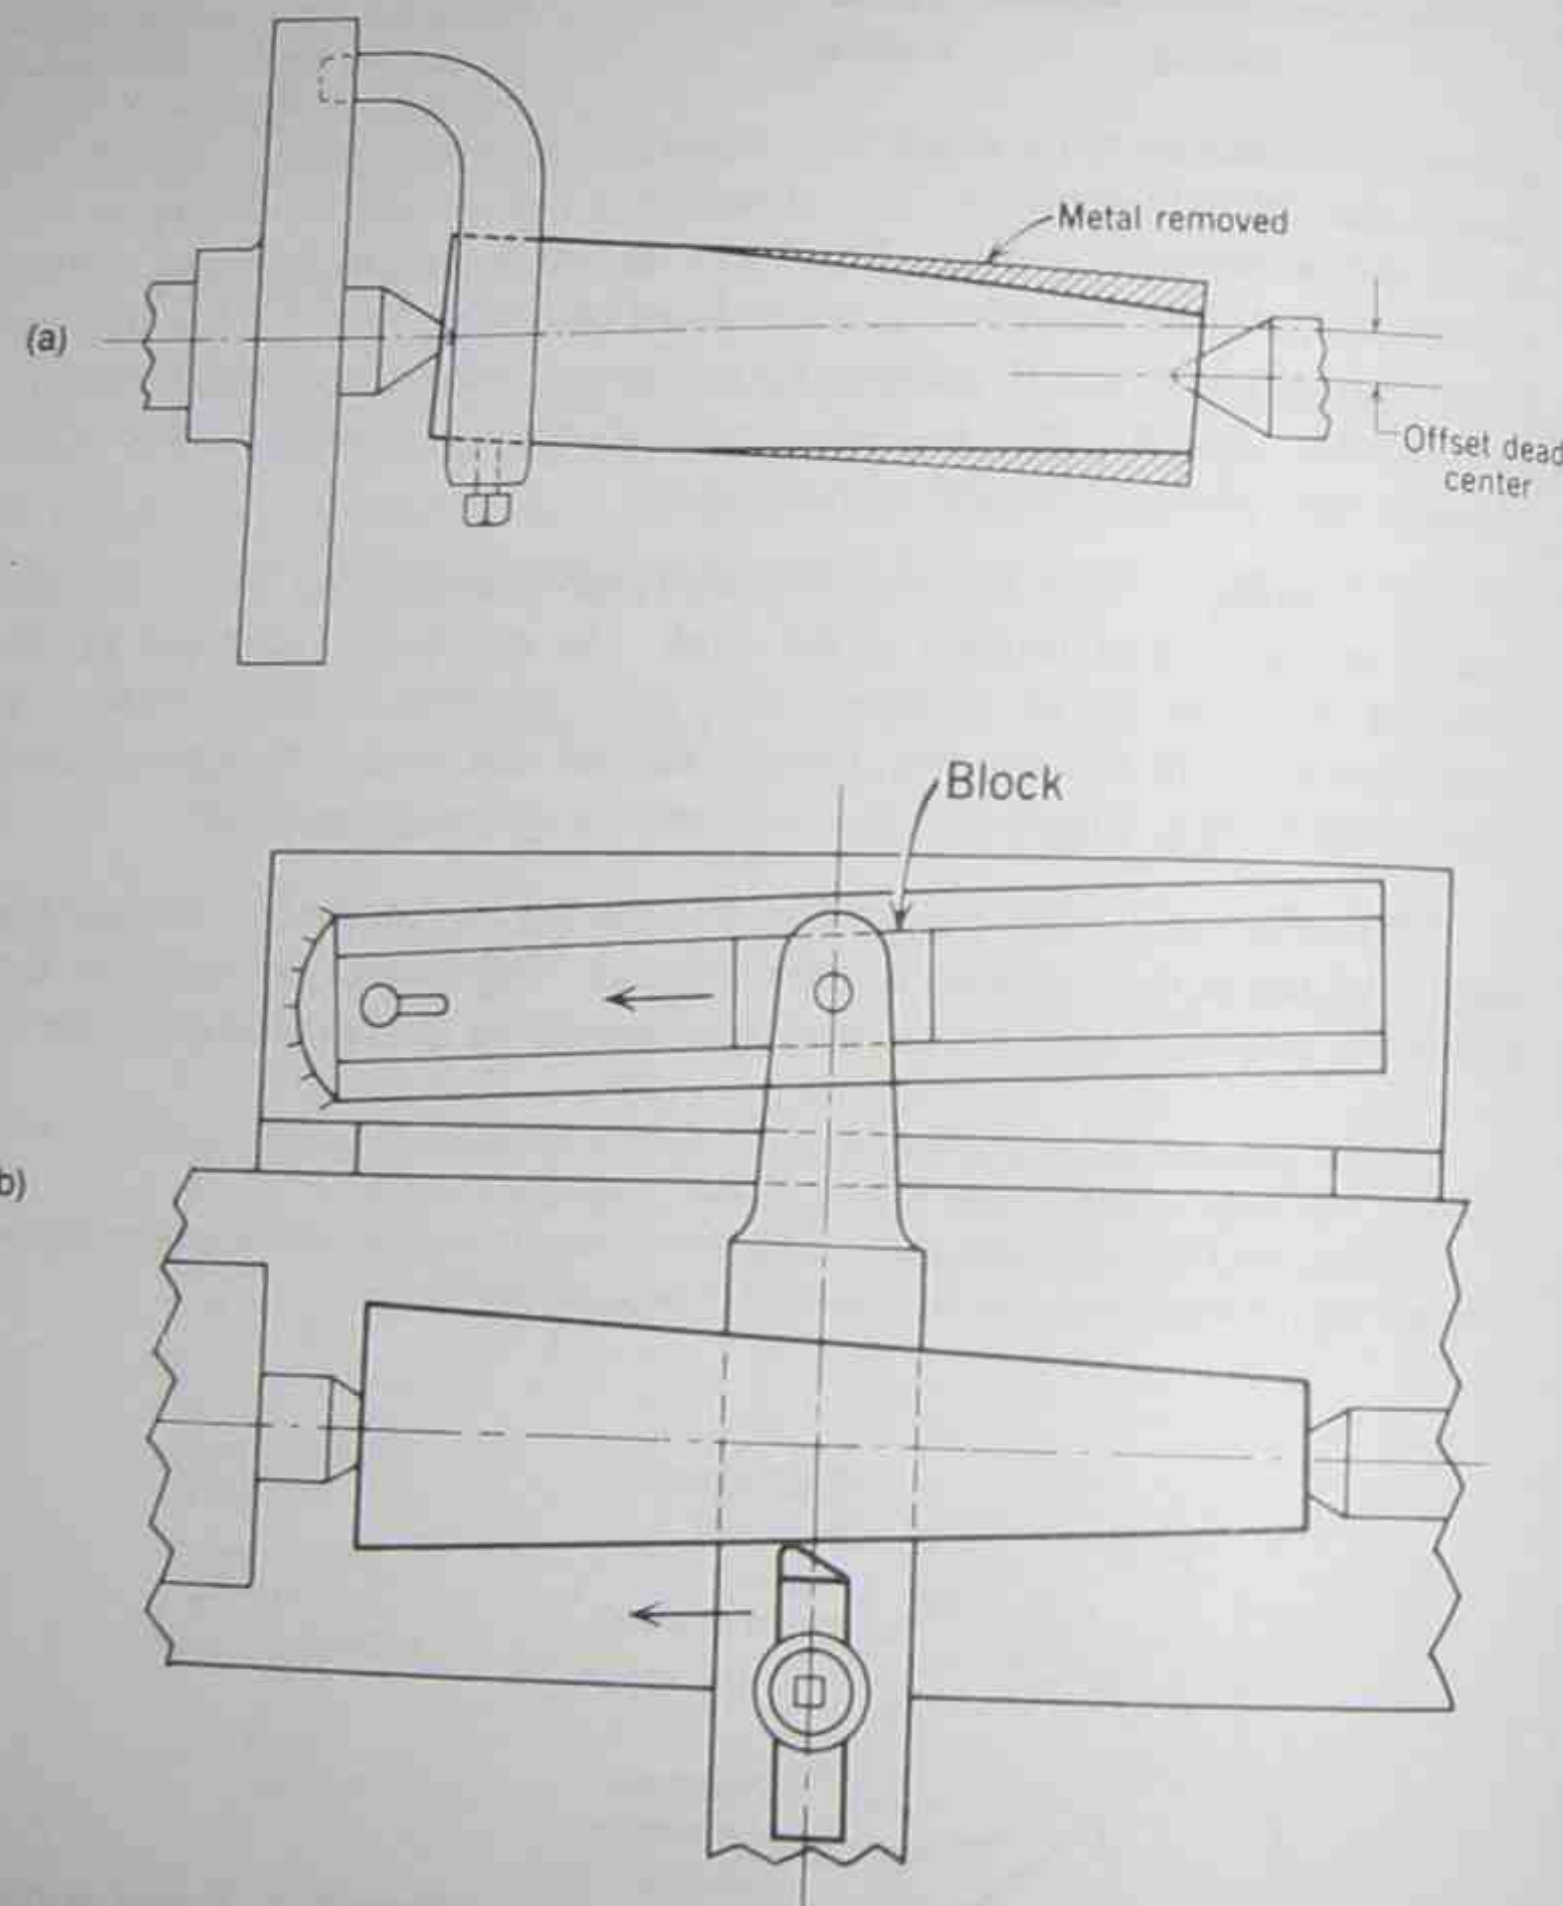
Taper turning using a tailstock offset (a) and a taper attachment (b).
